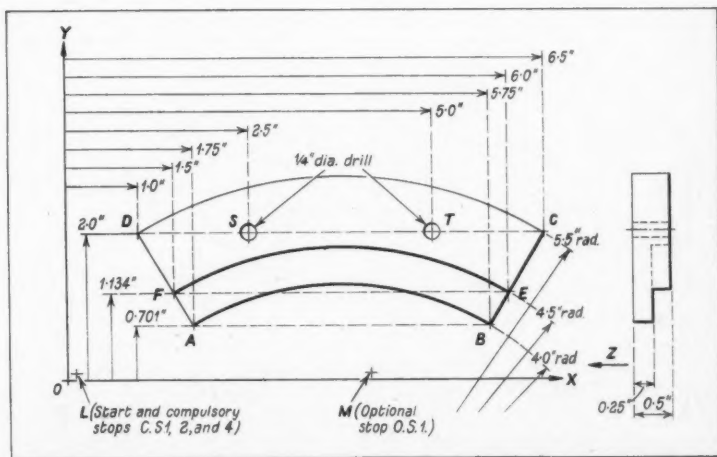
Typical workpiece showing the recommended method of setting out co-ordinate dimensions
